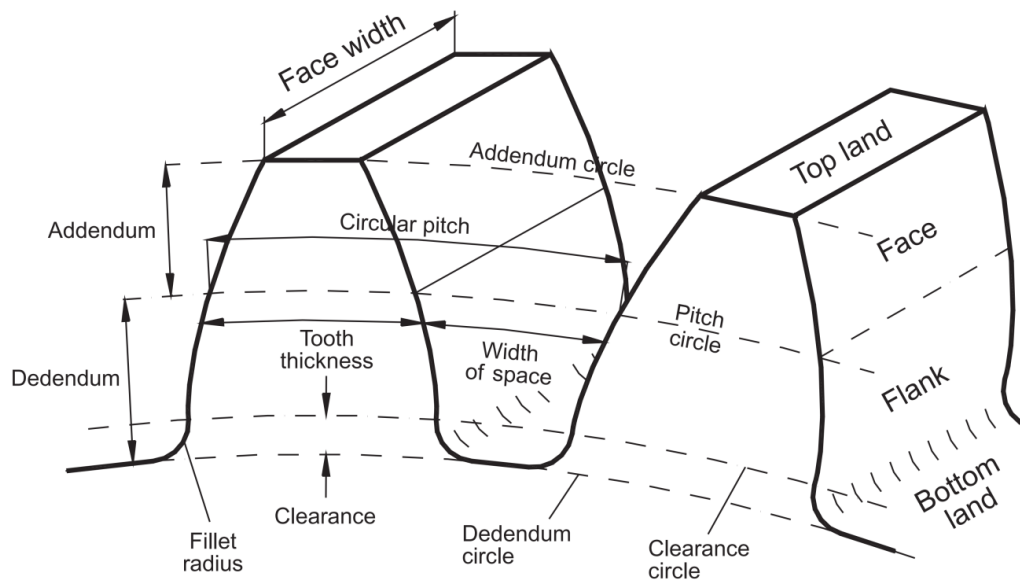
Principal terminology of spur gear. [Peter R.N.Childs 2019]
